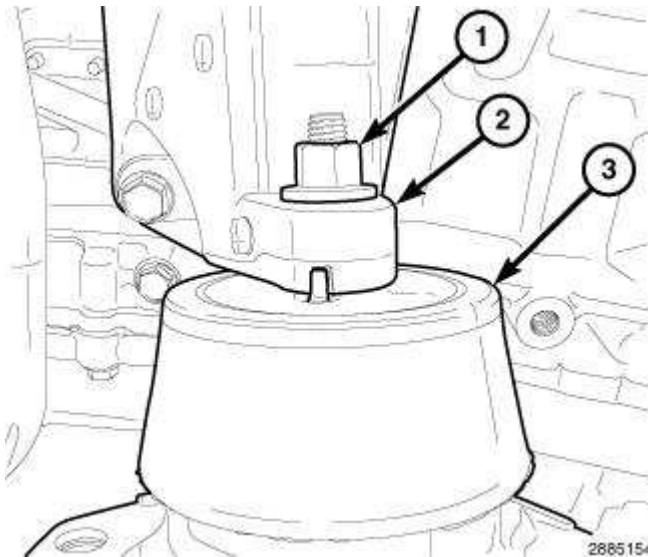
Left Engine Mount Isolator & Upper Retaining Nut
